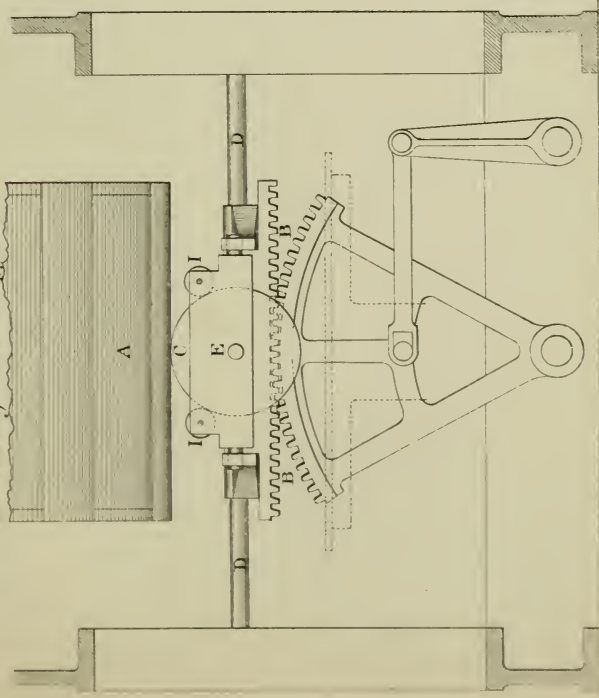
Side Elevation, showing Roller raised for inking the Polygon.
